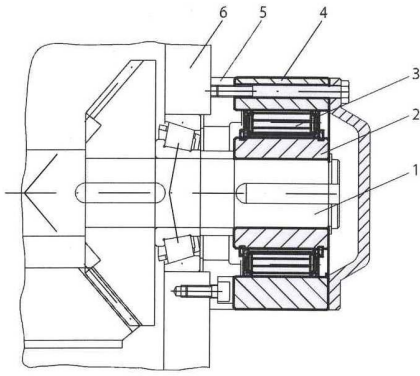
Helical bevel gear with integrated freewheel as backstop
